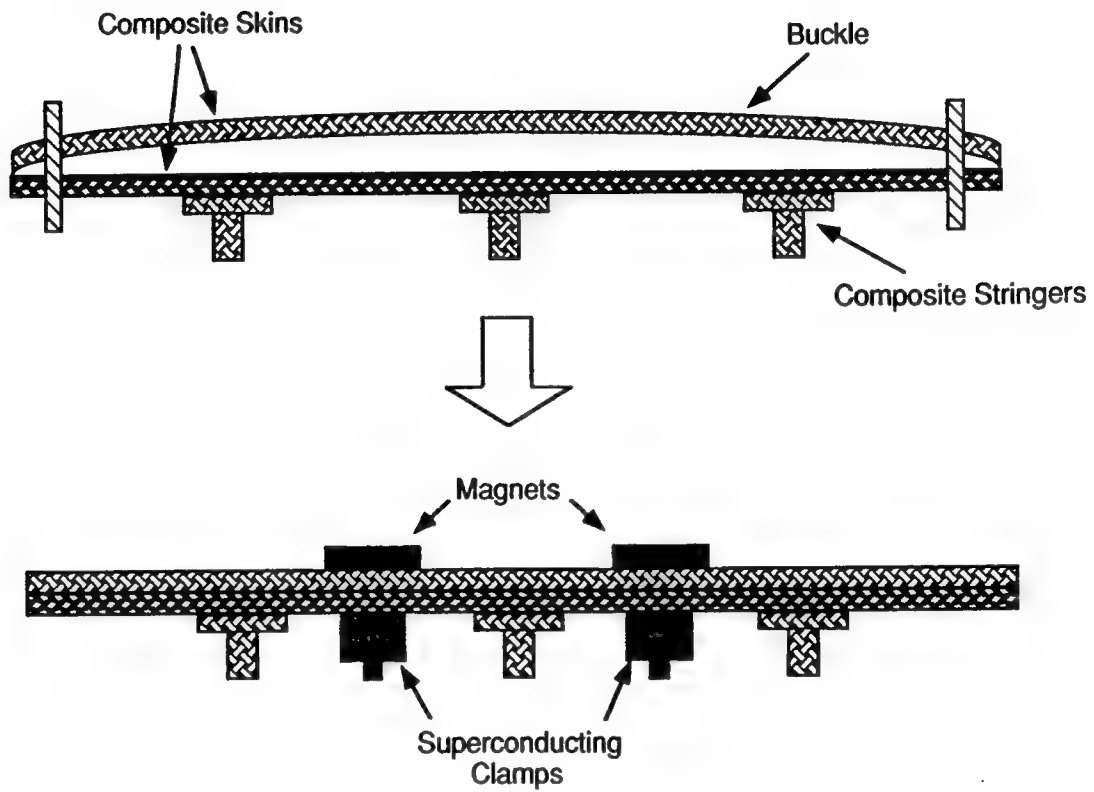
Buckle removal during subassembly of composite structures with superconductor clamps.
